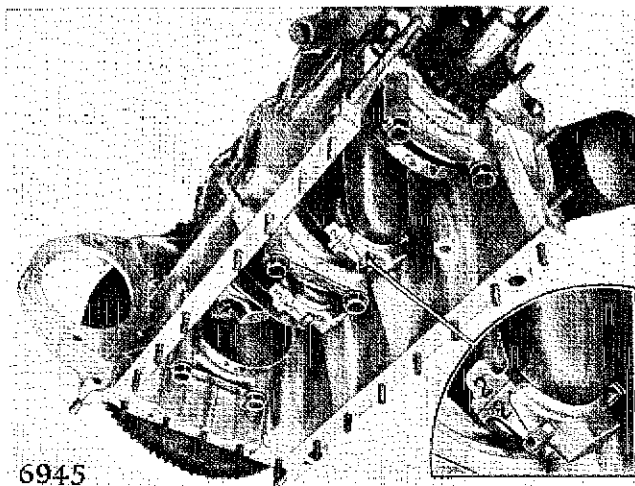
Locking plates and locking washers correctly fitted to main bearings and big ends
